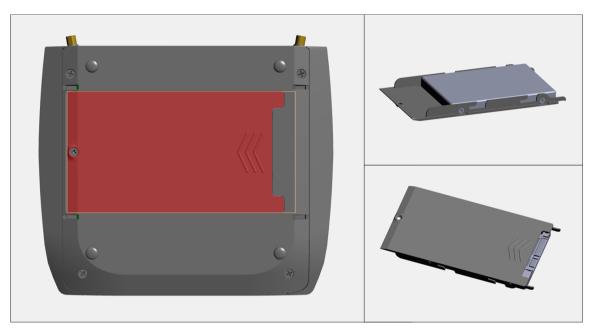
IPC2 service door with mounted HDD/SSD storage drive
